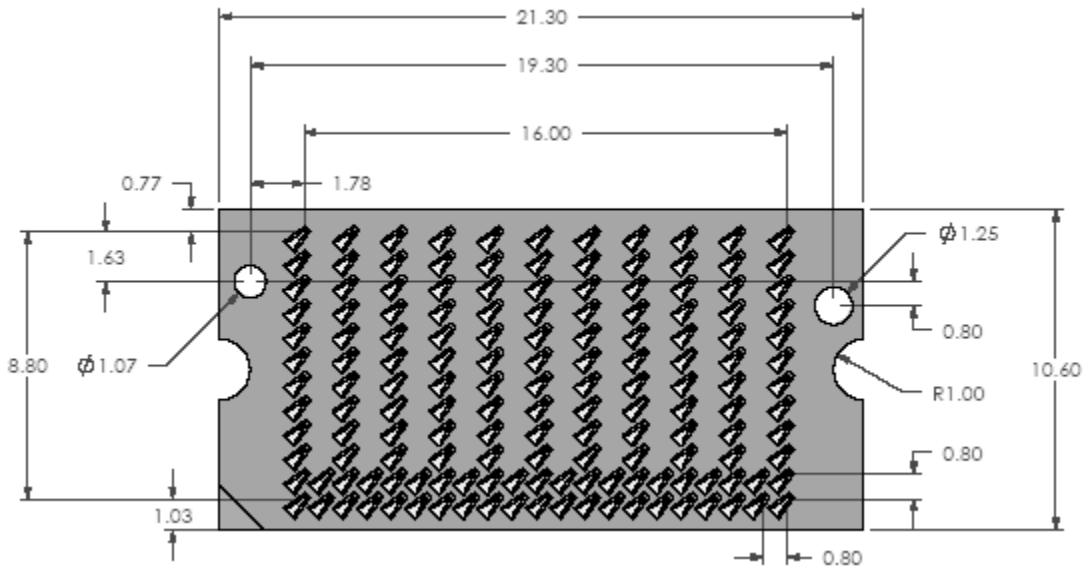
Z-RAY Mating Connector's Mechanical Dimensions
